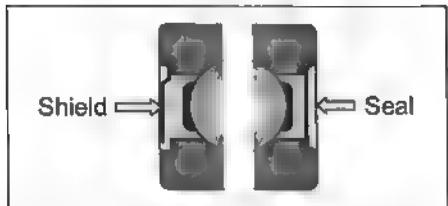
Bearings may be fitted with one or two metal shields or rubber seals to protect them from dirt or to prevent liquid leakage.
